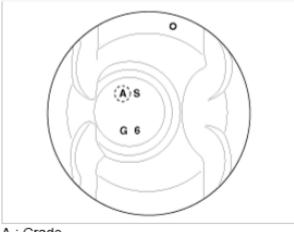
Cylinder Block Crankshaft Journal Bore Mark Location Courtesy of HYUNDAI MOTOR AMERICA
